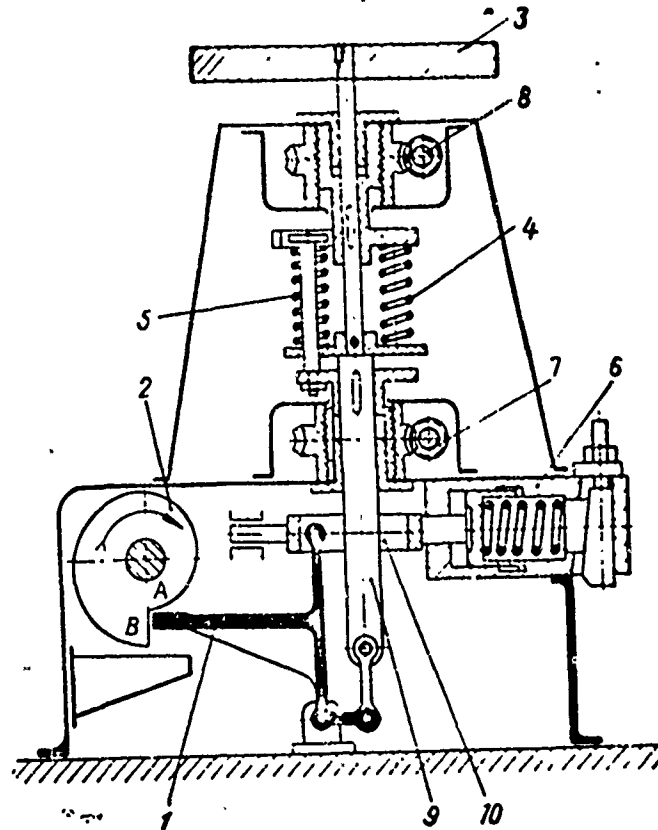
Diagram of the jostling stand: 1 - lever; 2 - cam; 3 - table; 4, 5 - springs; 6 - damper; 7, 8 - worm gears; 9 - rod; 10 - link.
